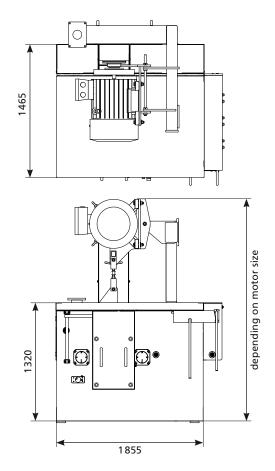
Dimensions (mm) of a KME3-1016 with overhead motor, right-hand design
